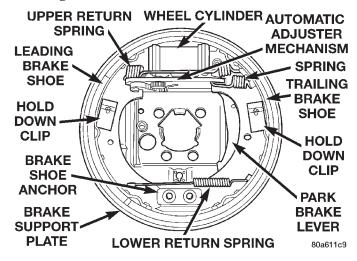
Varga Rear Wheel Brake Assembly (Left Side Shown)
